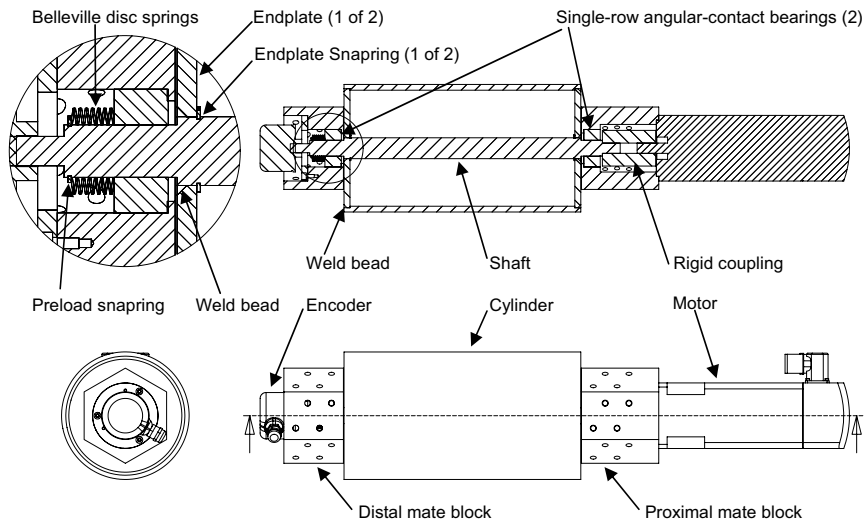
A power motor drives the power cylinder. The cylinder shell is welded to its endplates and these to the shaft. A series of Belleville disc springs load the cylinder bearings.
